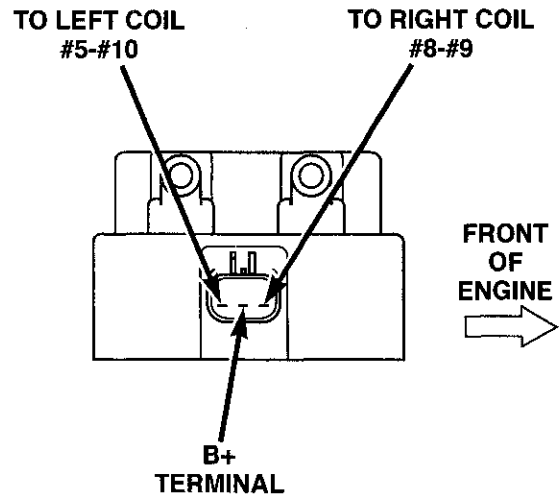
Checking Coil Primary Resistance—Rear Coils—8.0L V-10 Engine
